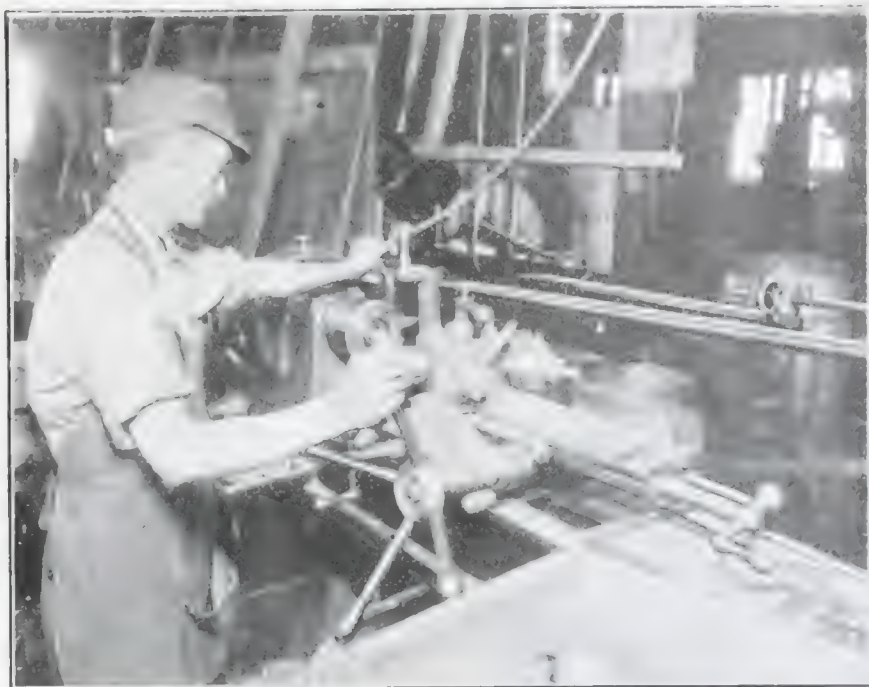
FIRST MACHINING OPERATION ON FUSE SOCKETS
